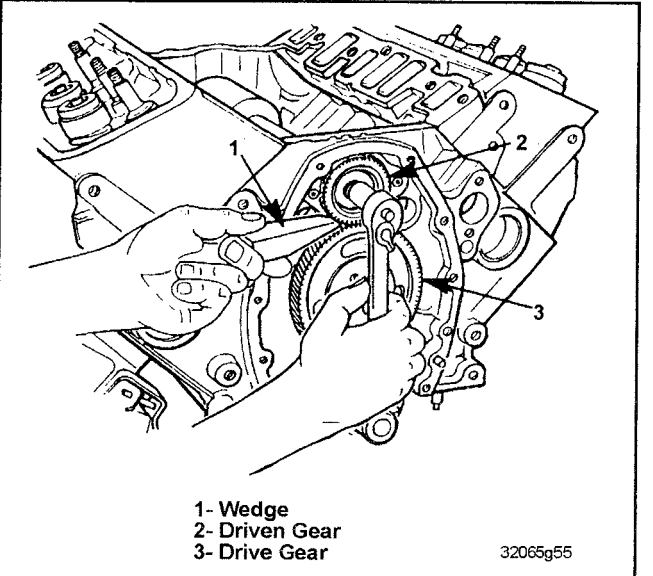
Use a wooden wedge to keep the balance and camshafts from rotating while loosening the retaining bolt
